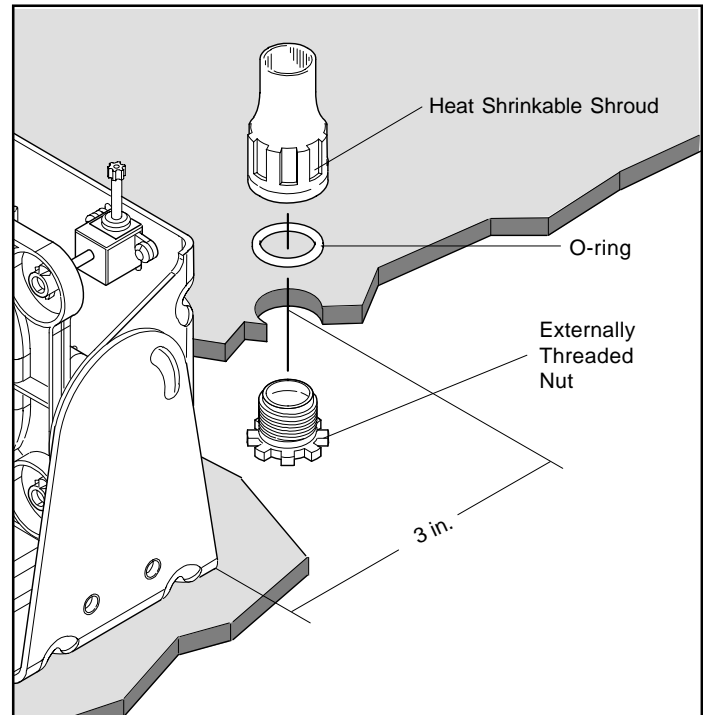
Heat Shrinkable Shroud Assembly (camera harness not shown)
